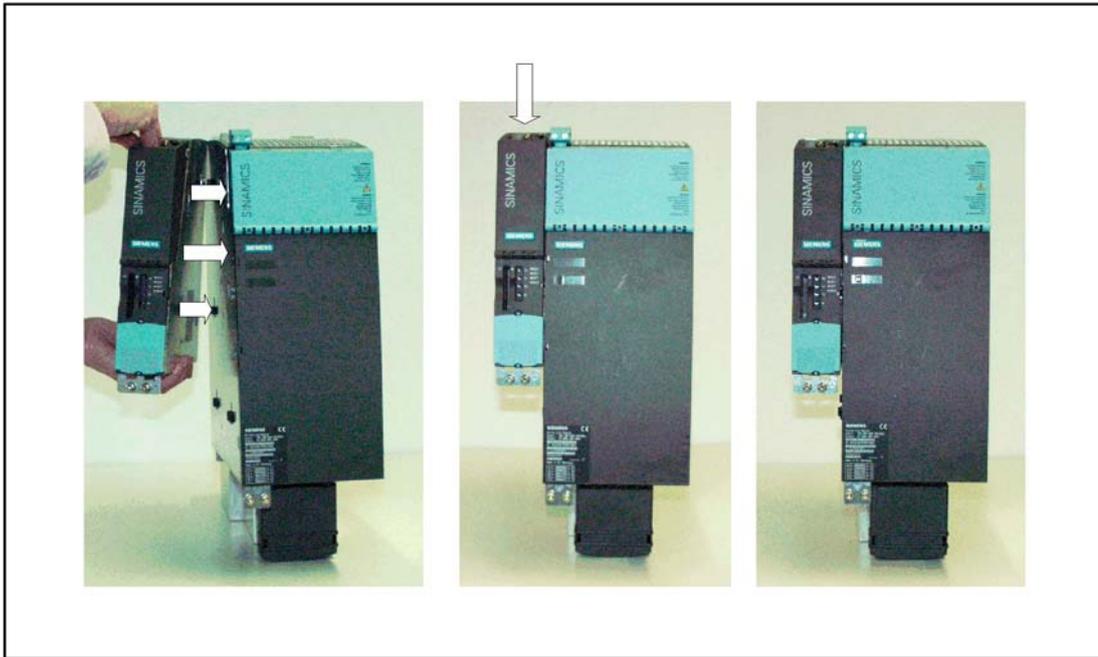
Mounting the CU320 directly on a Line Module in booksize format
